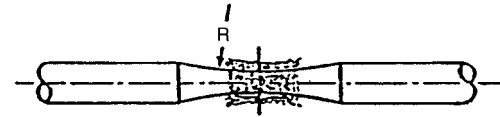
Specimens With a Continuous Radius Between the Ends for Rotating Beam or Axial loading
